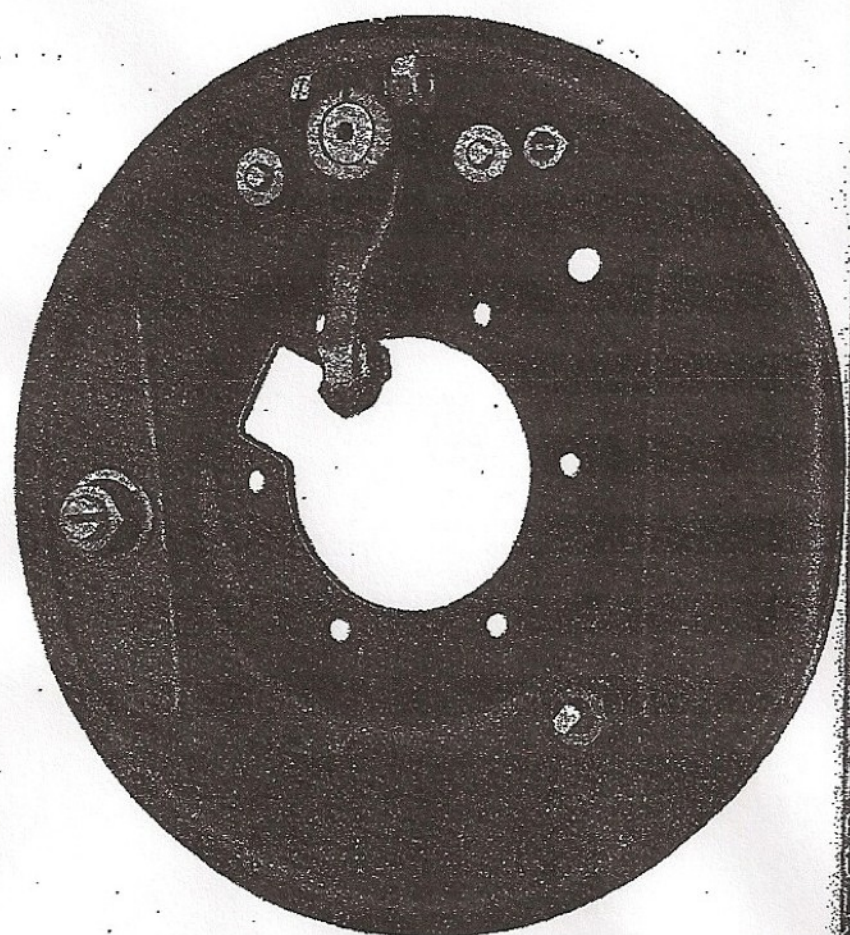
Frame side of the backing plate for same model brake as shown in Fig. N2
